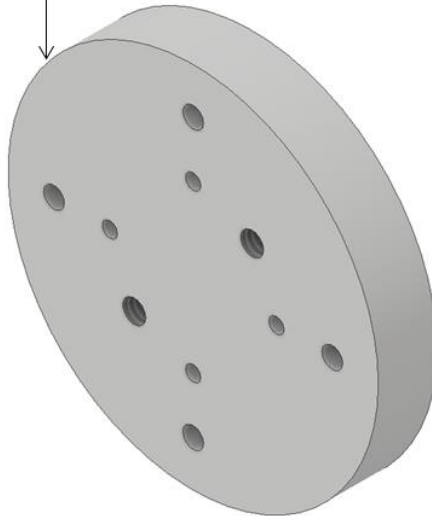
CAD drawing of the mating plate. See Appendix Figure 3 for detailed drawings.
